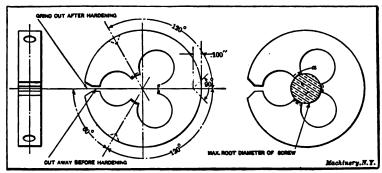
General Dimensions and Design of Approved Type of Adjustable Round Split Button Die
